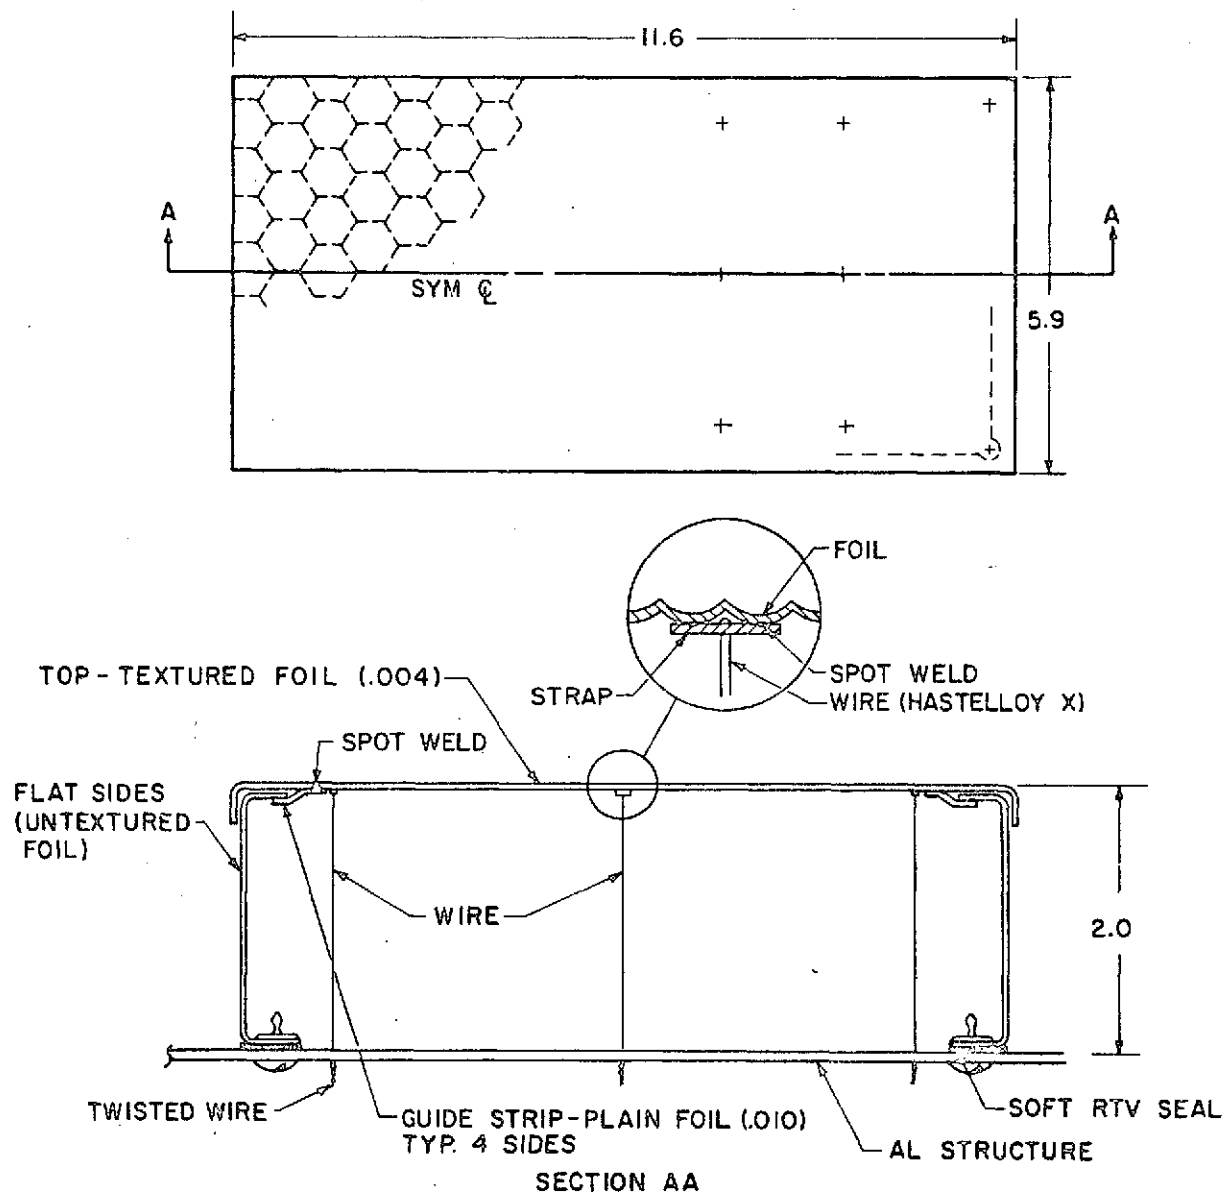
DETAIL OF FLOATING TOP SPECIMEN DESIGN (SPECIMEN 7)
